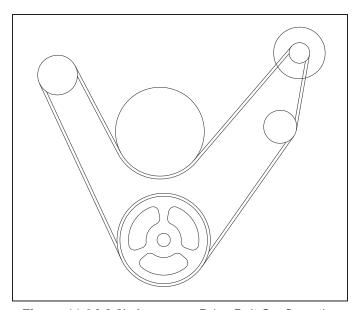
A 6.2L Accessory Drive Belt Configuration
